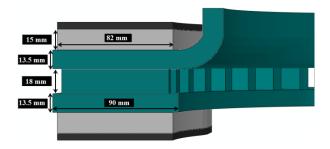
A cross-section of brake disc and pads along with necessary geometric dimensions
